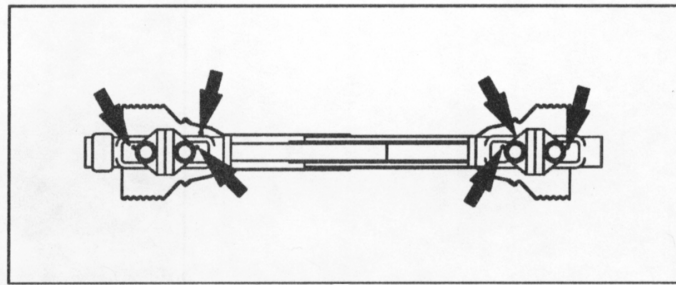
DRIVE SHAFT (VERTICAL SHAFT)
